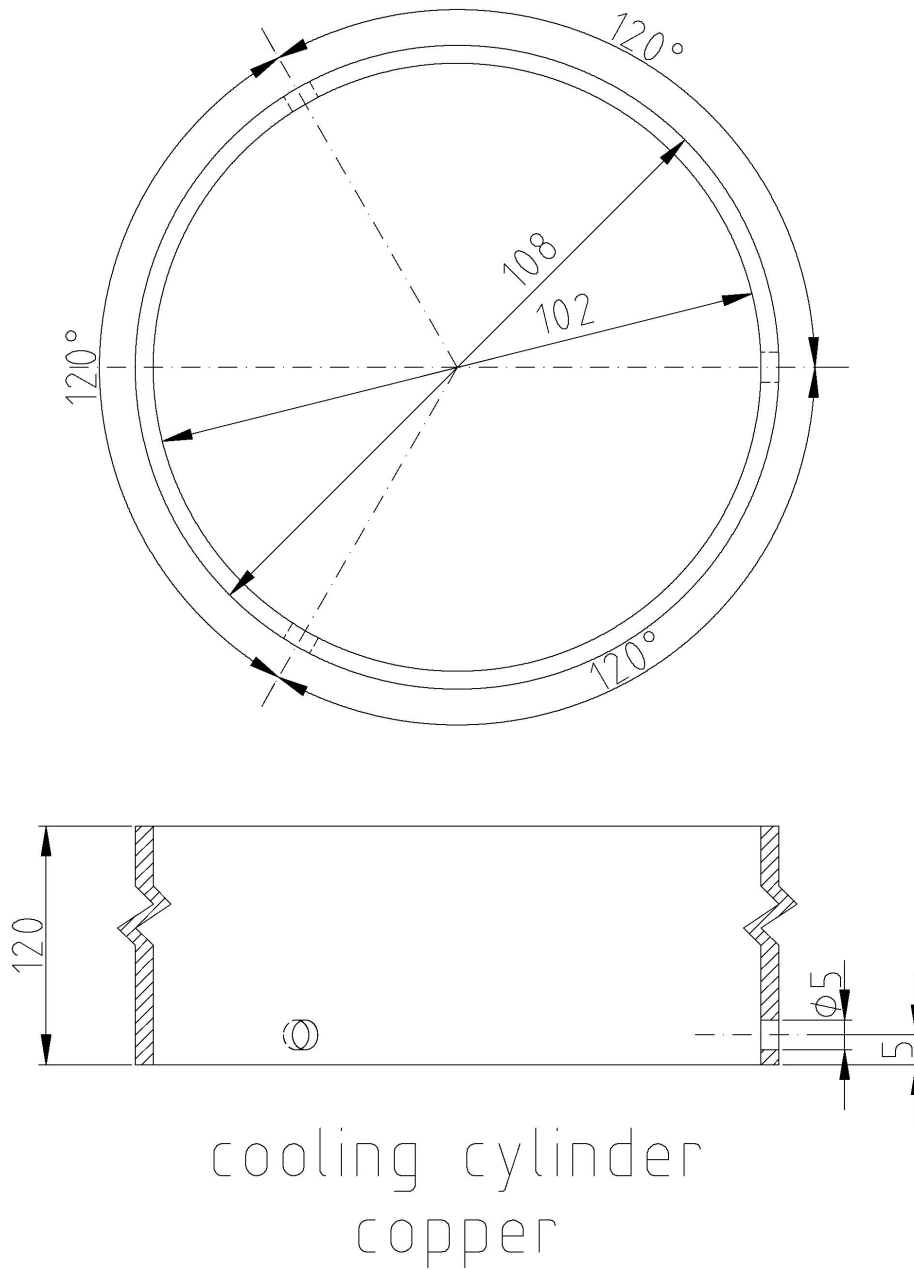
Cooling cylinder, [CD:\Drawings\Prototype\Cooling\_cylinder.dxf]
